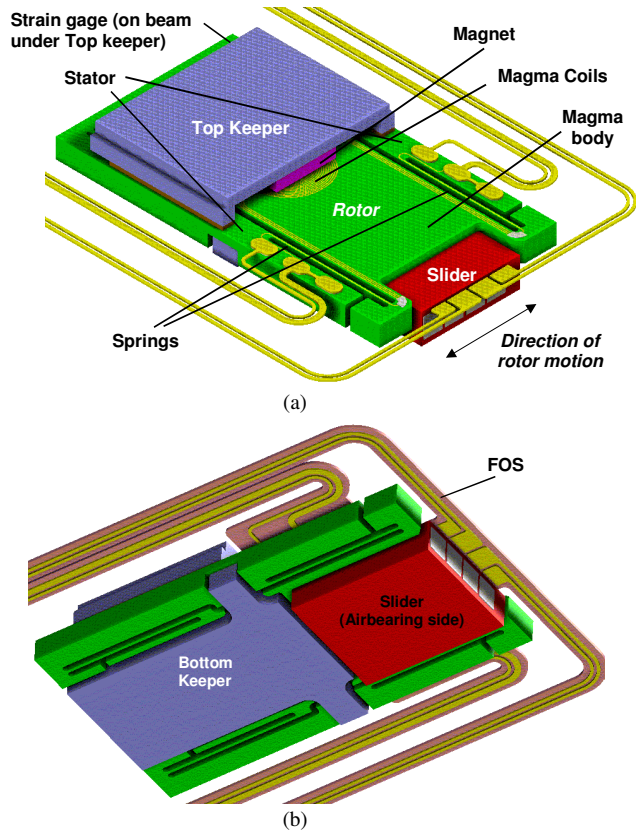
(a) Top view and (b) bottom view of a MAGMA actuator CAD drawing with a slider attached to a FOS.
